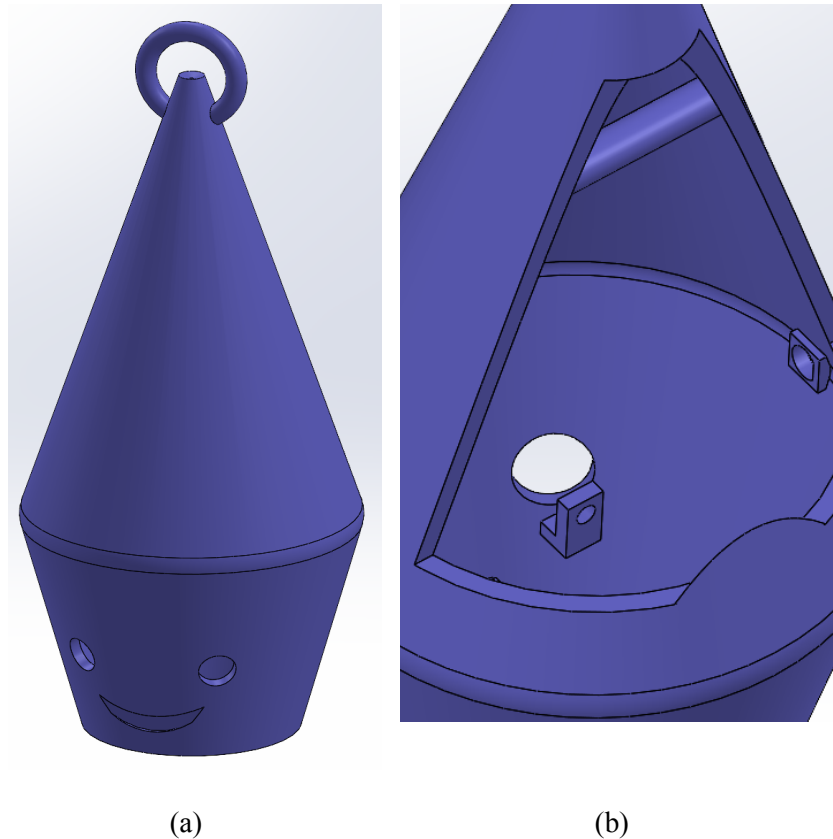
(a) The exterior CAD mock up of our squid head. (b) An inside view of the squid head, using the removed back. By creating the squid with a part of the back missing, we can insert the eyes and tongue, and accompanying mechanisms before replacing the opening with another 3D printed cover. From the back, we can see the brackets for the eyes to attach to (only the right eye bracket is currently shown), one of the holes for the rod the mechanism will be inserted into, and the bar at the top of the interior of the head to which the tubing will be tied.
